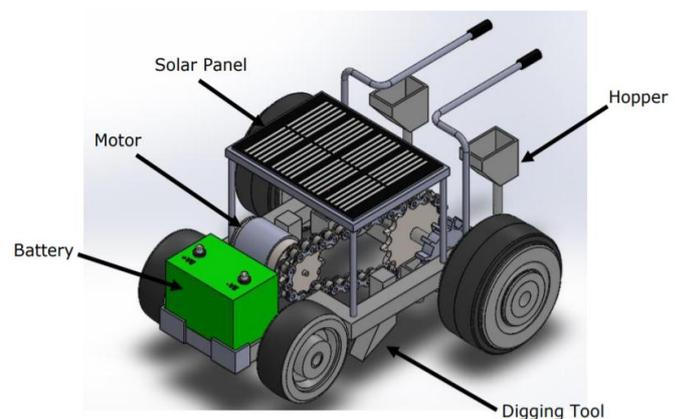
SEED SOWING MACHINE MODEL VIEW 1
